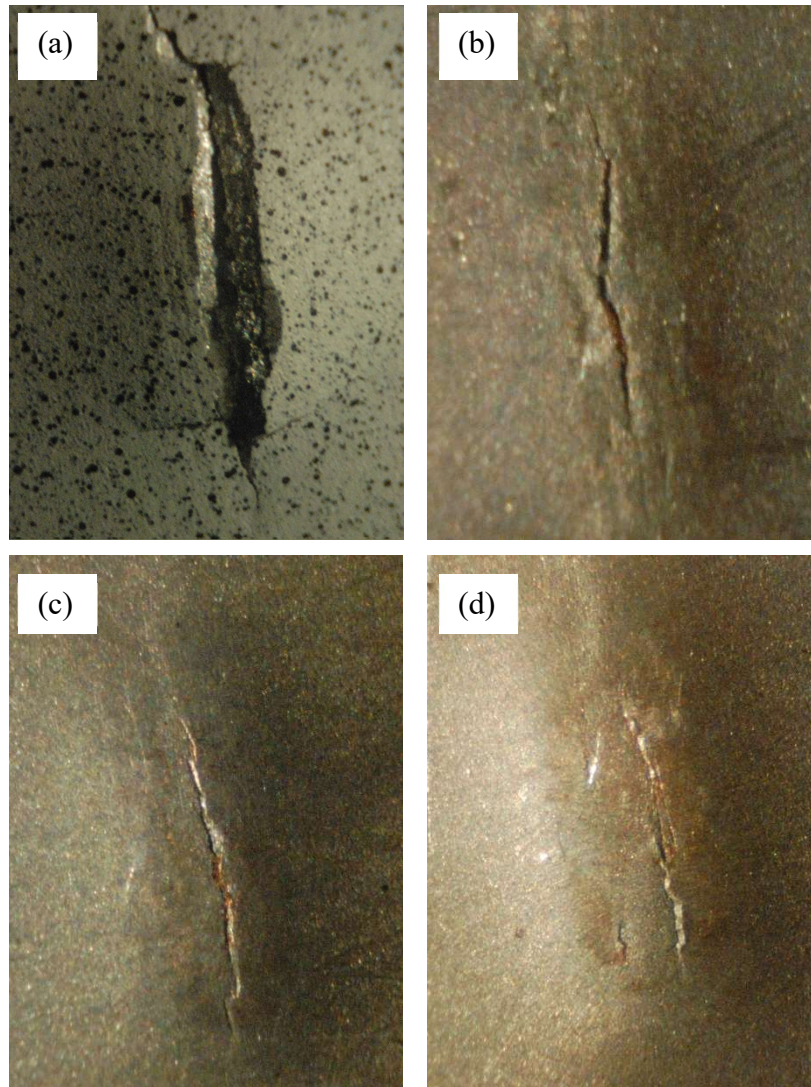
Post-test Al2024 elliptical punch test specimens showing fracture locations for (a) unbacked, (b) 1.575 mm backing plate, (c) 2.36 mm backing plate and (d) 3.175 mm backing plate
